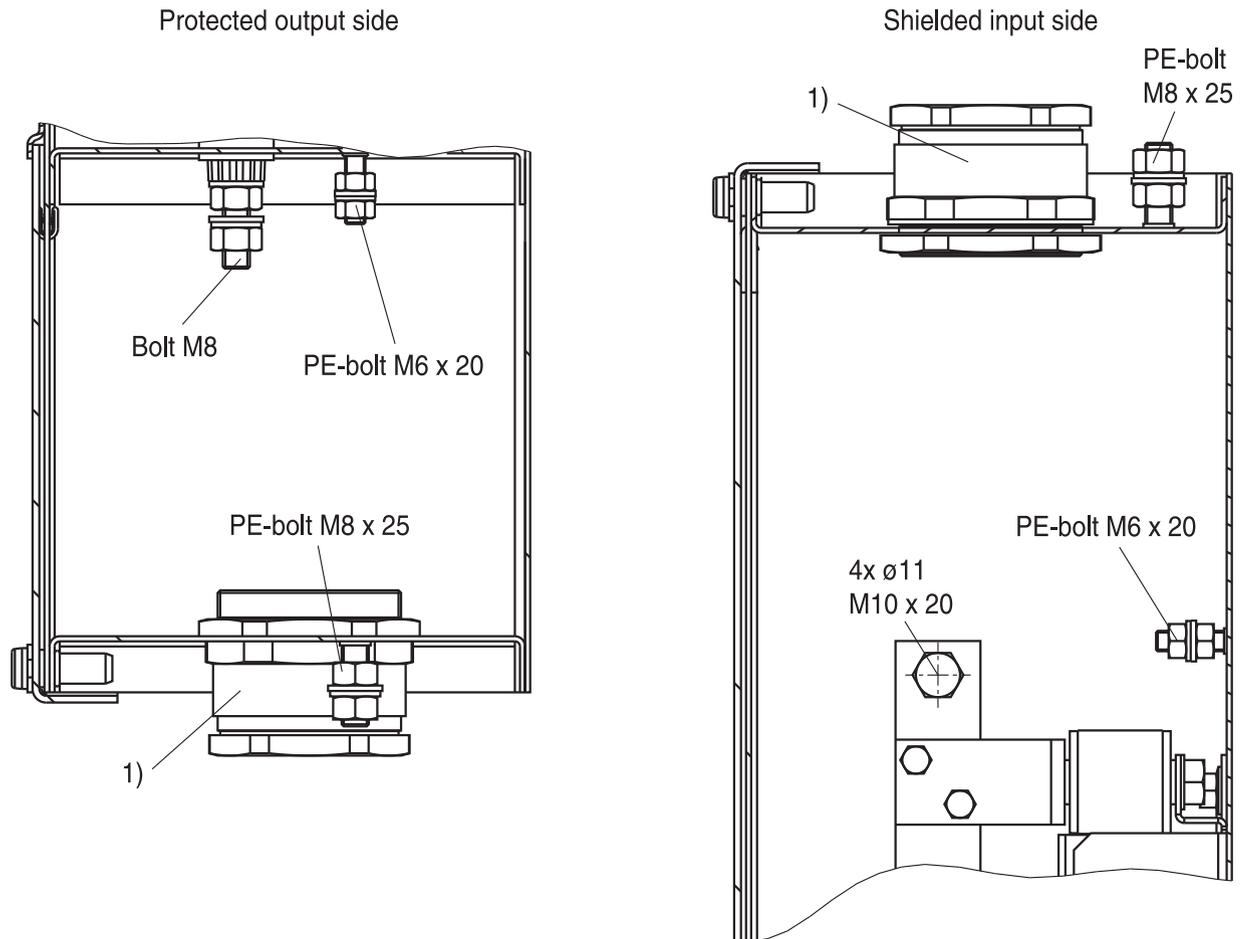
B84299C1101E313 (4 × 100 A) for assembly from inside to the shielded wall
